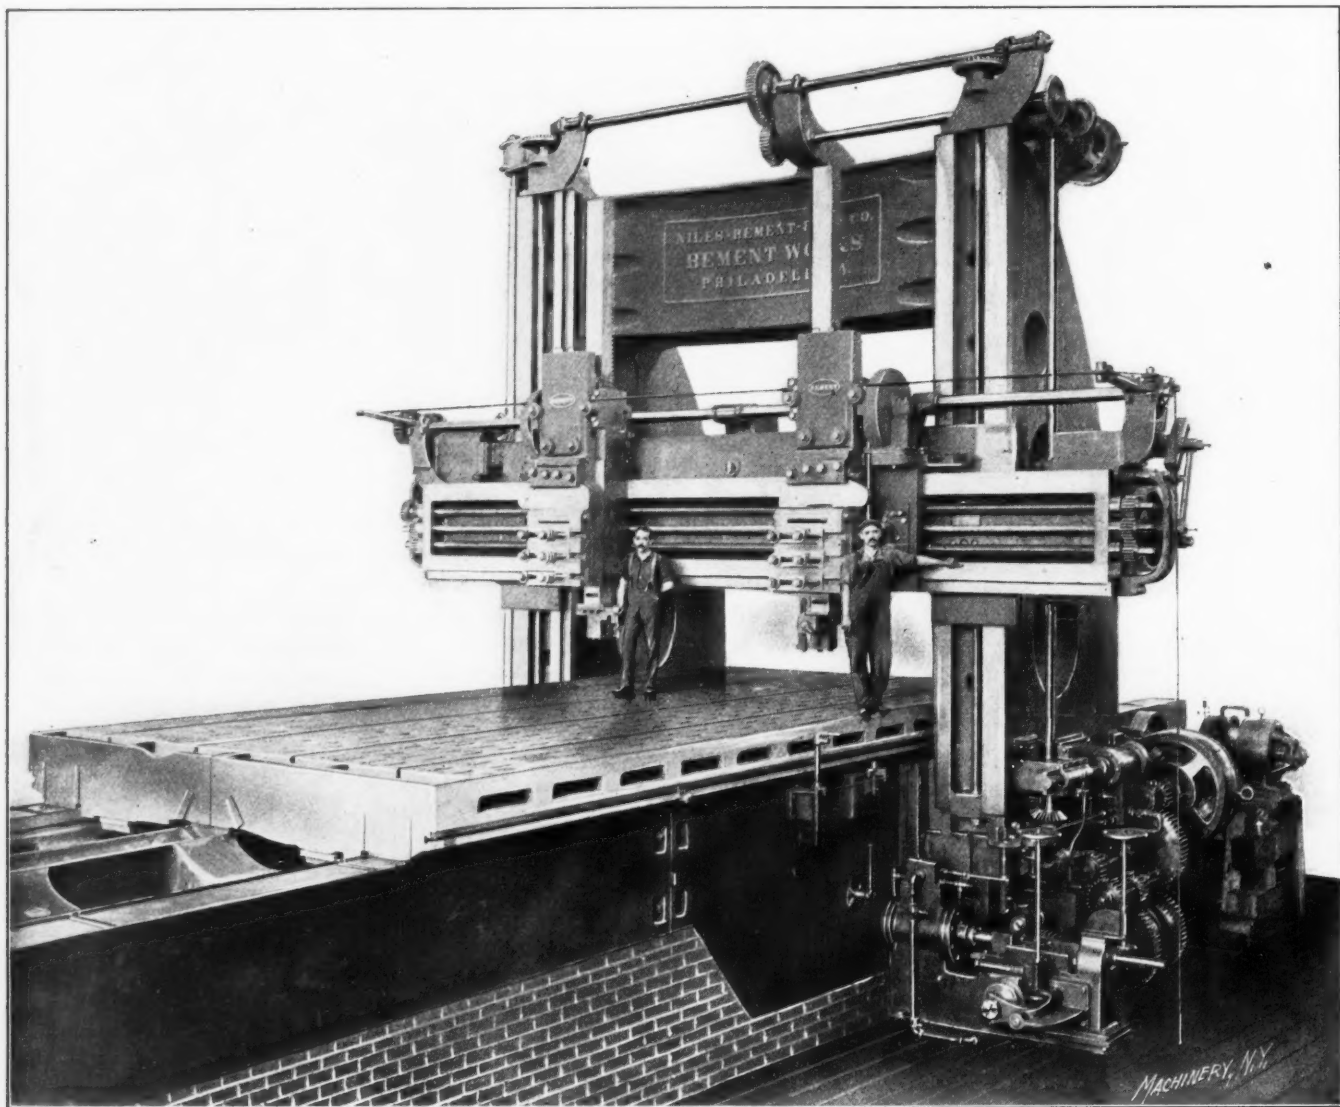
General View of the Planer showing the Slotting Attachment and the Feed Mechanism.
